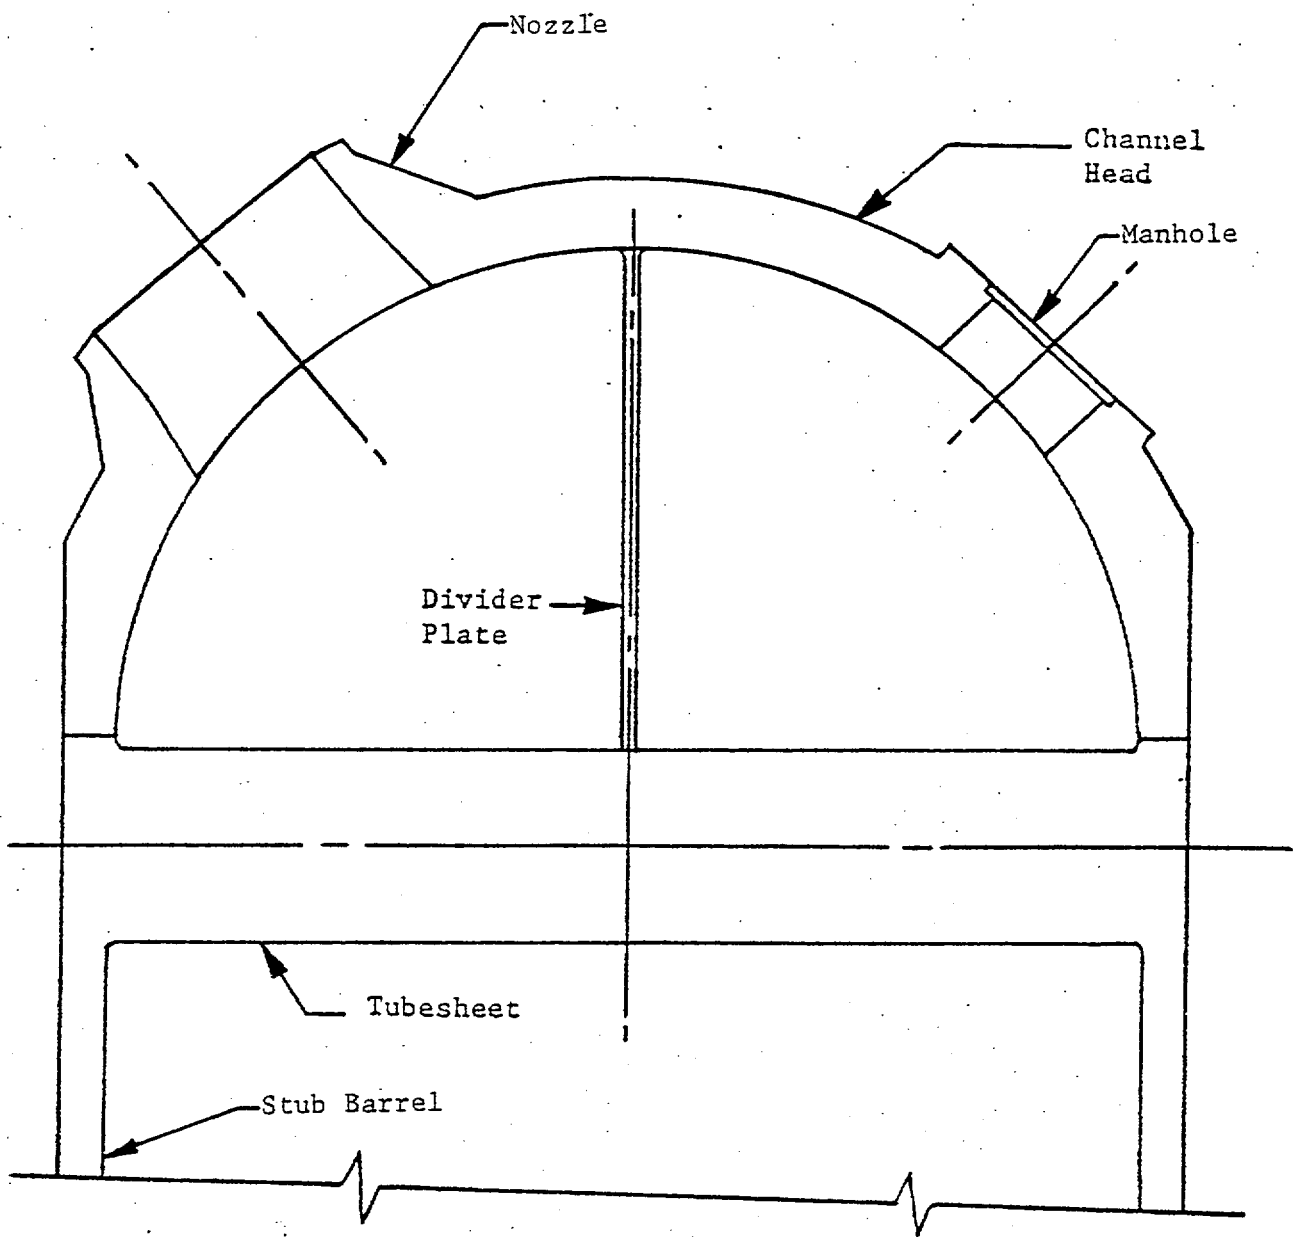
Channel Head, Tubesheet and Divider Plate Assembly
